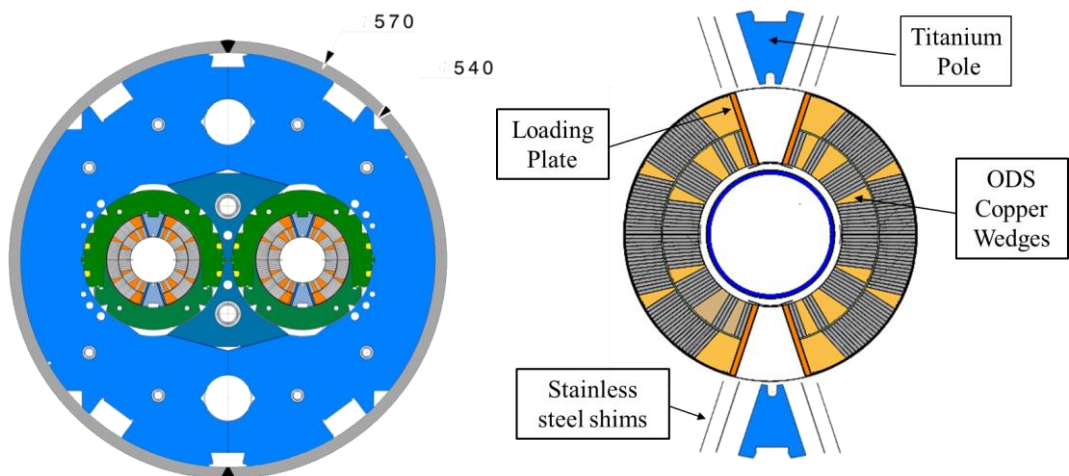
MBH-11 T magnet cross section (left). 11 T coil package, CERN design, including removable pole and loading shims (right).
